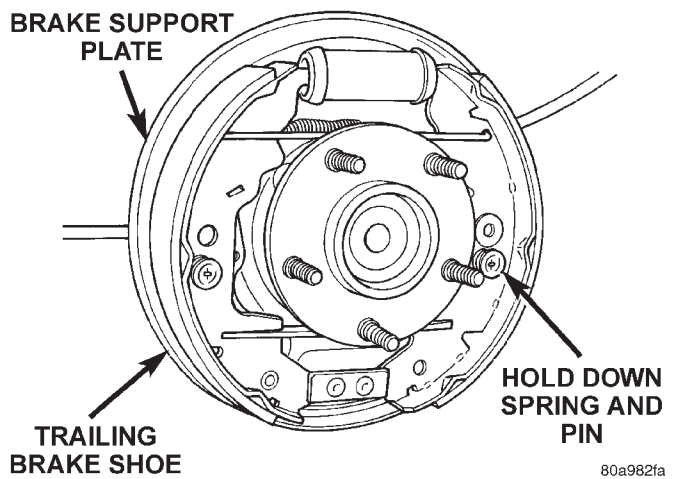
Trailing Brake Shoe Hold Down Spring And Pin
